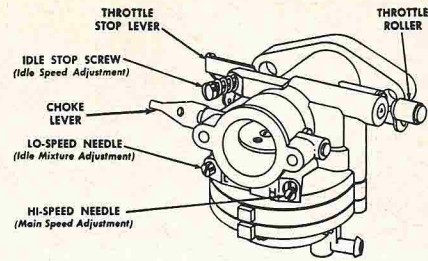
View showing location of adjustment points on some Tillotson carburetors. Refer also to Figs. HL6 and HL7.
